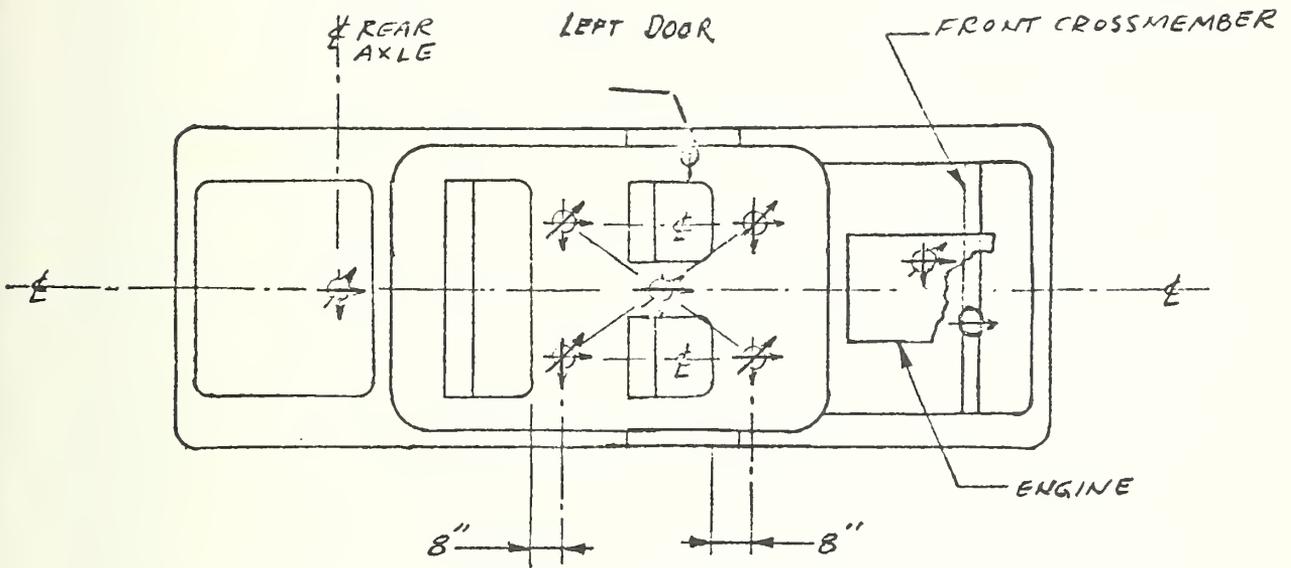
Compact Car Floor Plan, Typical Accelerometer Locations
